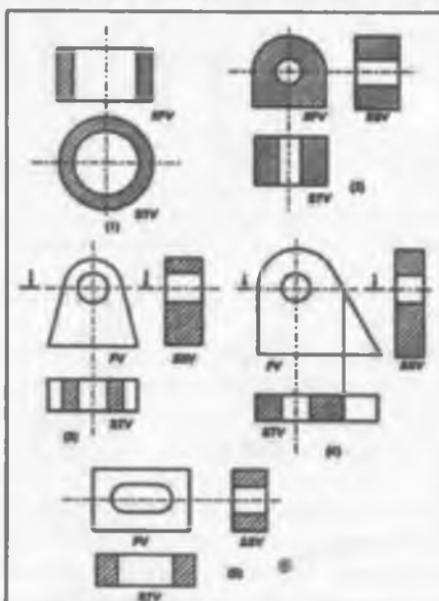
Sectional Views-Sketches of Basic Solid Shapes
